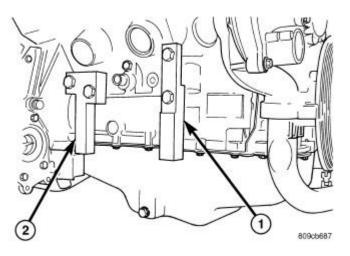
Identifying Adapter Tools Mounted On Block Courtesy of CHRYSLER LLC
